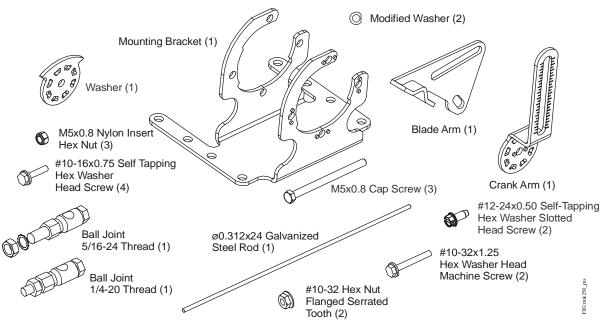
Parts Included in M9208-250 Remote Mounting Kit
